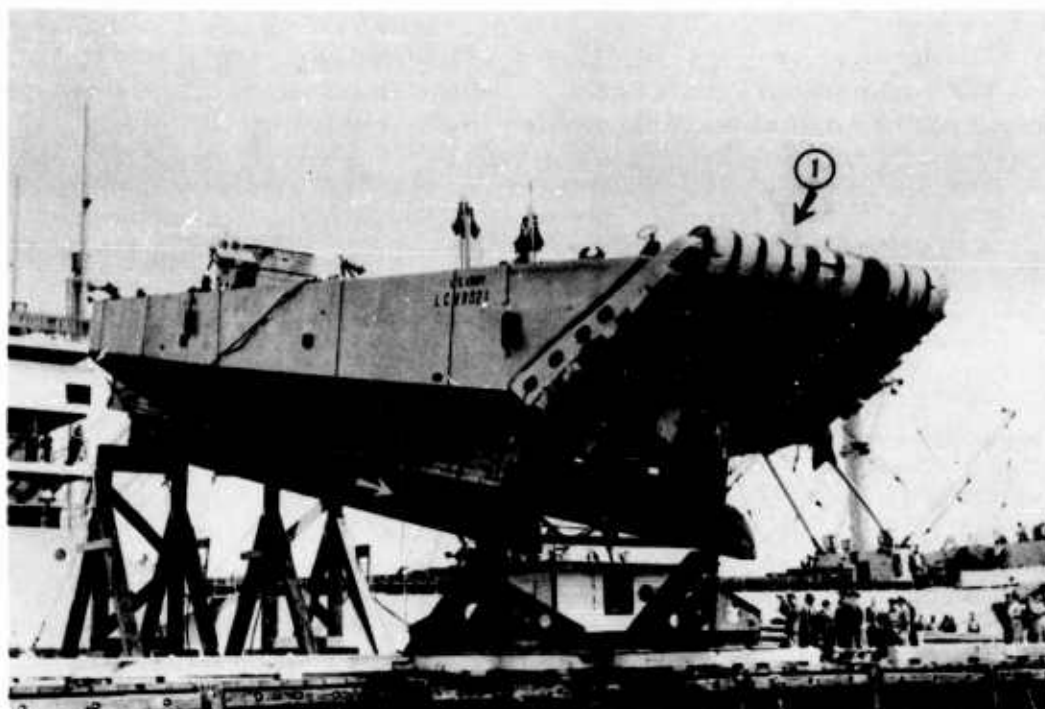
LCM-8 Placed on Steel Standing Ways at an Angle of 12-1/2 Degrees. Note the vertical layer of aircombing on the bow ramp (1) and the steel standing ways (2).
